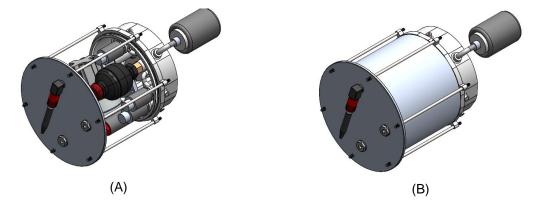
New assembly structure (view of internal components) (A) and covered (B)
